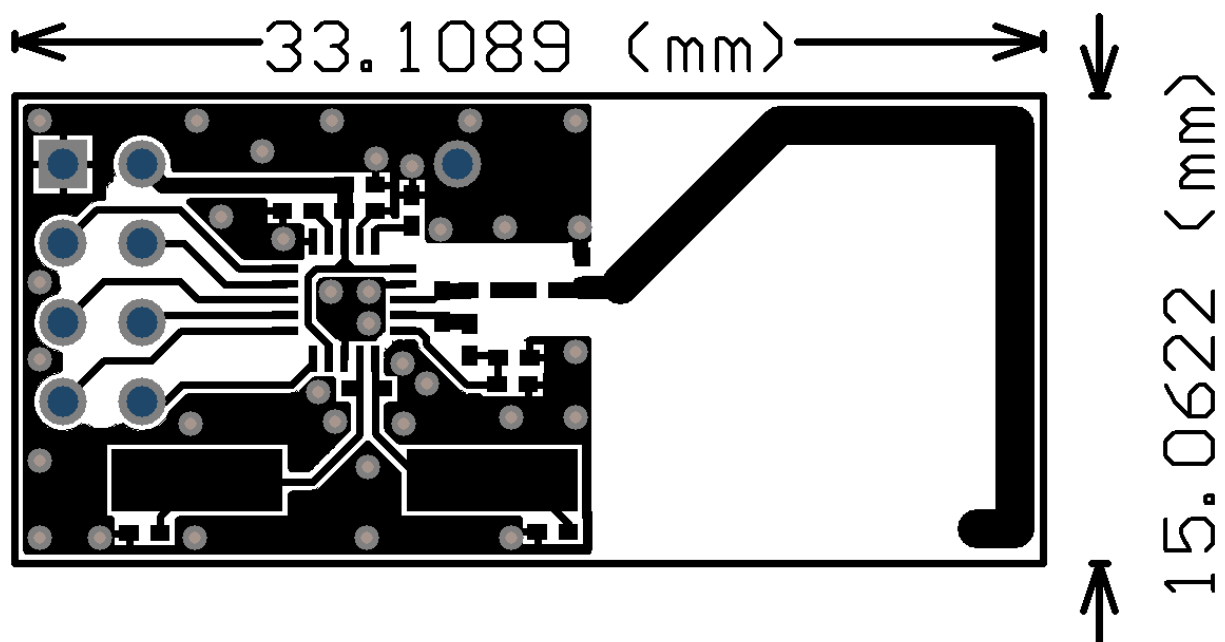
Top layer (nRF24L01+ RF layout with single ended connection to PCB antenna and 0402 size passive components)
